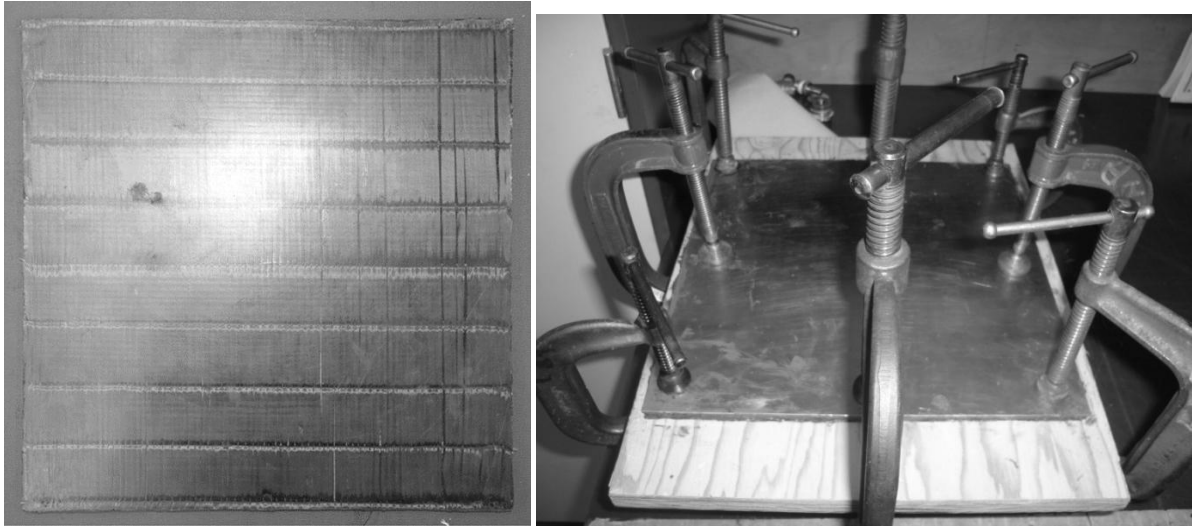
Manufacturing of the duplicate IHCT assembly
